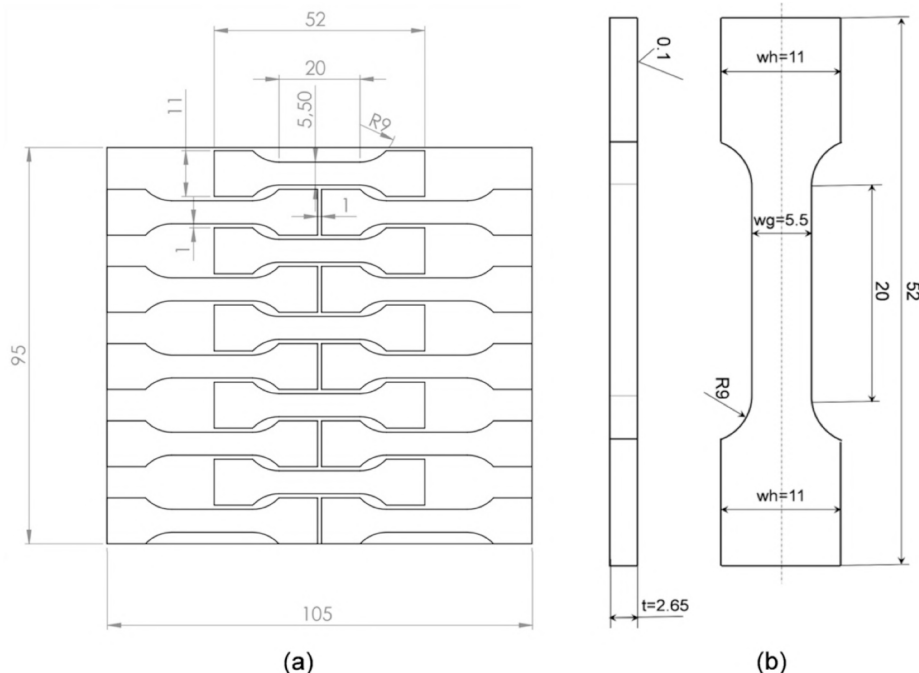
Sample cutting from the cold rolled sheet (a); sample drawing with dimensions in mm (b).
